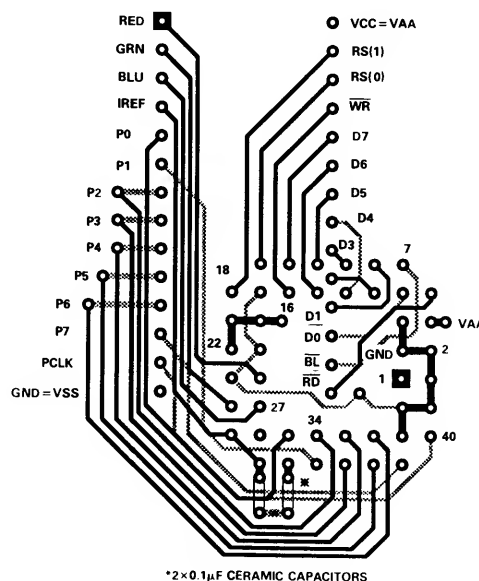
X-Ray View of Layout Using Socket Mounted PLCC
